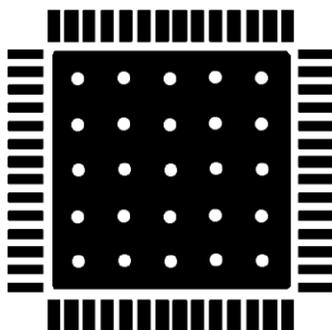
shows the solder mask region at the package. Each of the 25 plated through holes is in the center of each circle of solder mask. Black area indicates absence of solder mask.
